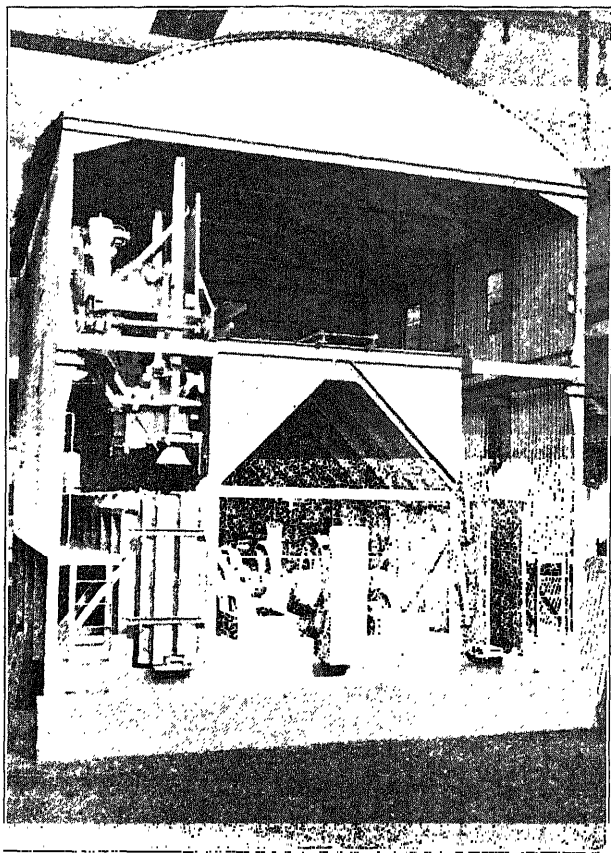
Double-Ended Coal Compressing and Coke Discharging Machine.
